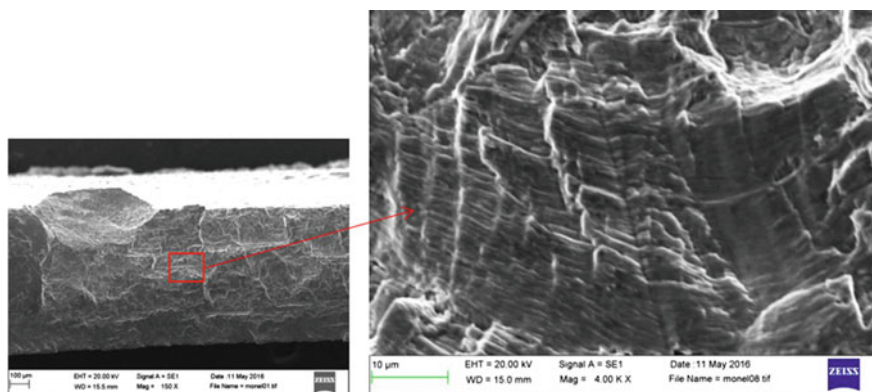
Microscopic striations, typical of fatigue fractures (Expansion joint section)
